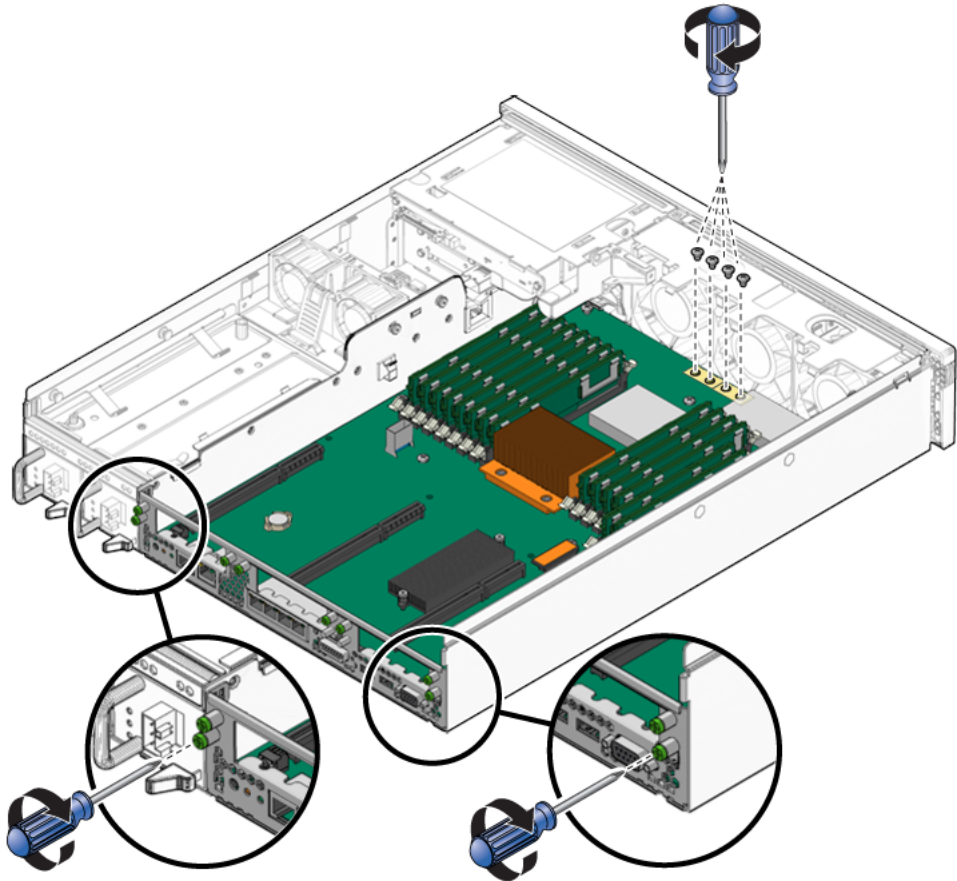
Installing the Motherboard Assembly Into the Chassis
